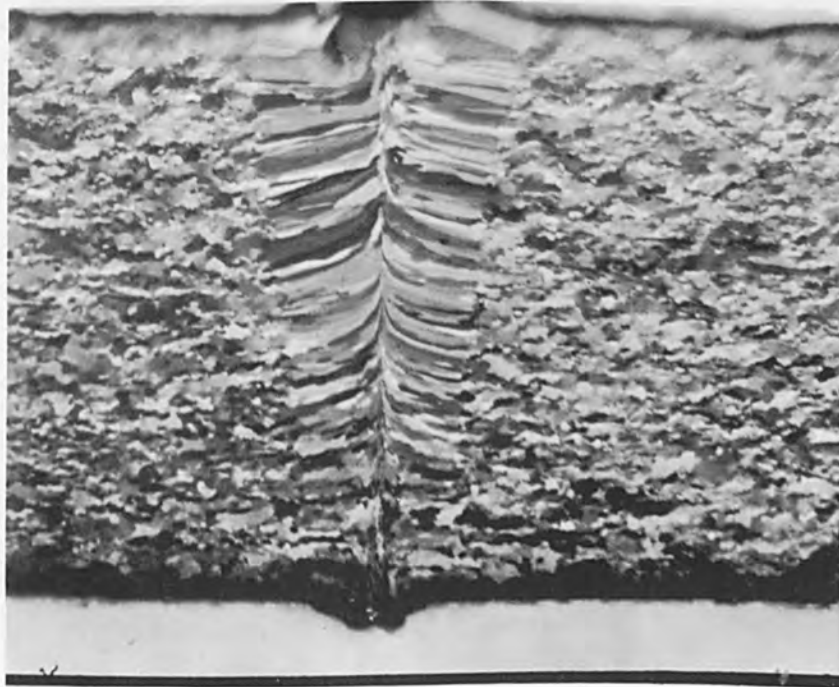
Weld Cross-section in 0.040-in. Beryllium
